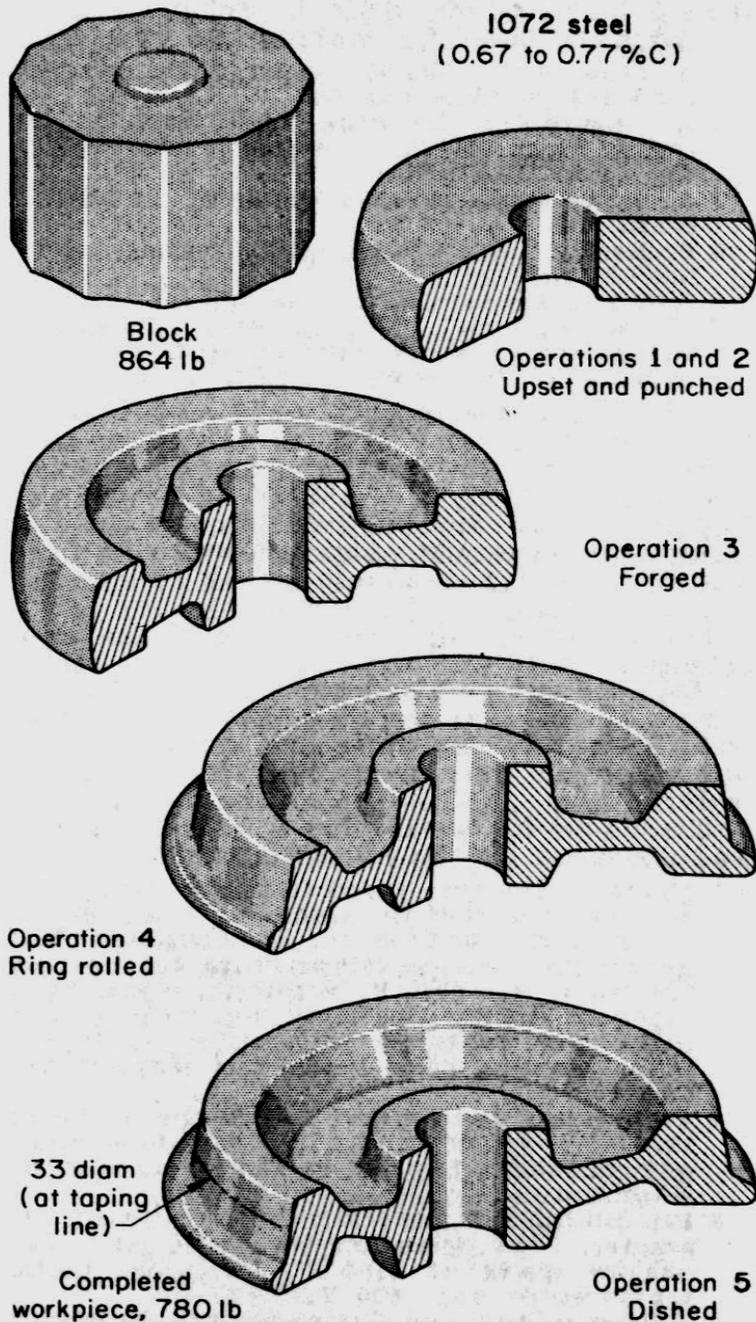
Steps in the forging and rolling of a railroad freight-car wheel (Example 111)
